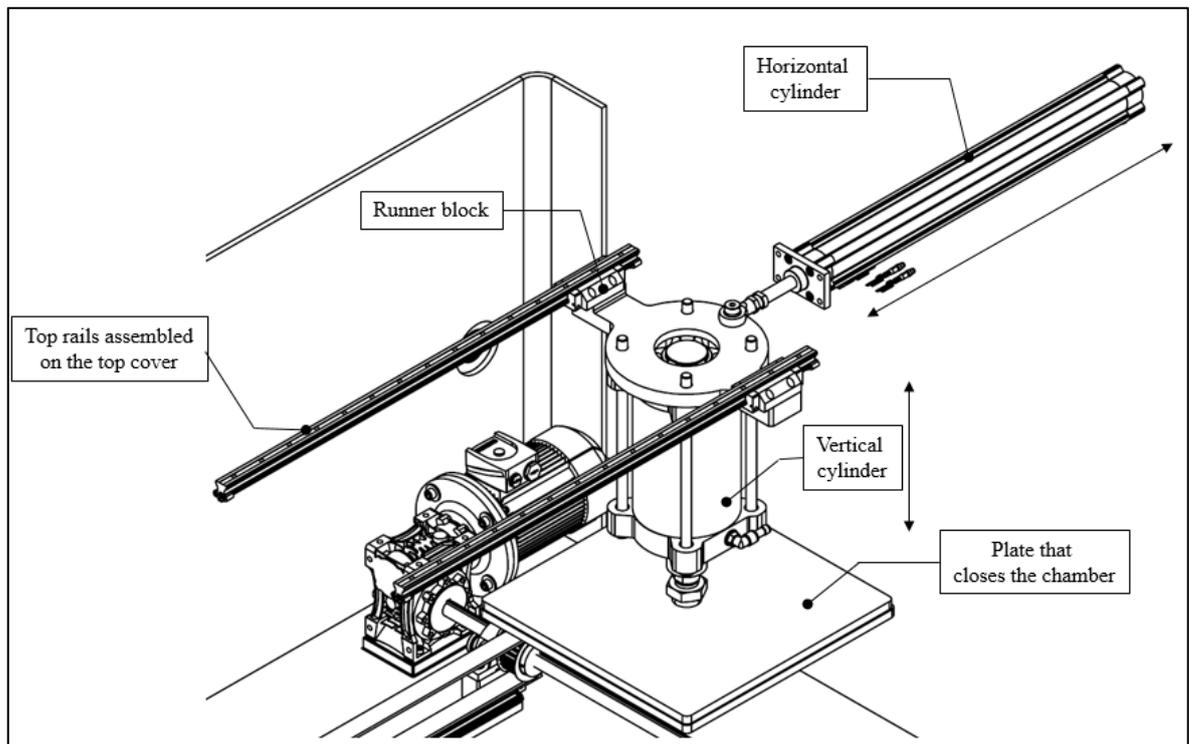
Top door assembly and directional movement (mod. Festo 2016n. p. 1; Festo 2016l. p. 1).
